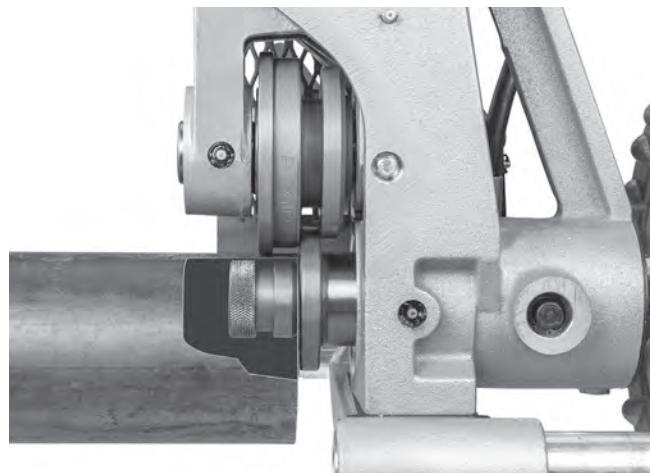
Placing Pipe over Drive shaft, Flush to drive shaft flange (Stabilizer removed for clarity)
